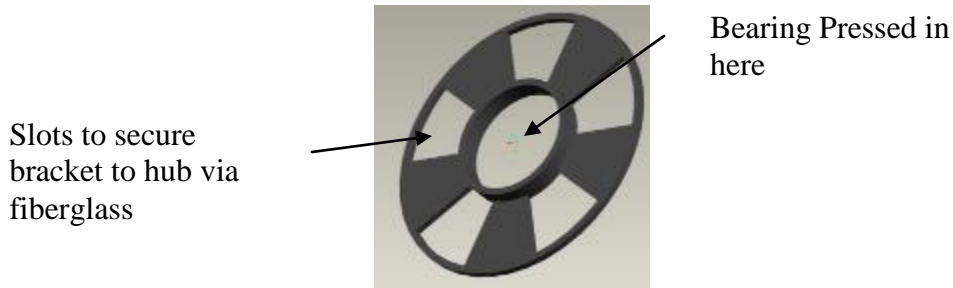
Spider bracket that connects to the hub and houses thrust bearing so the hub can transfer weight and spin freely on the 1 inch axle
